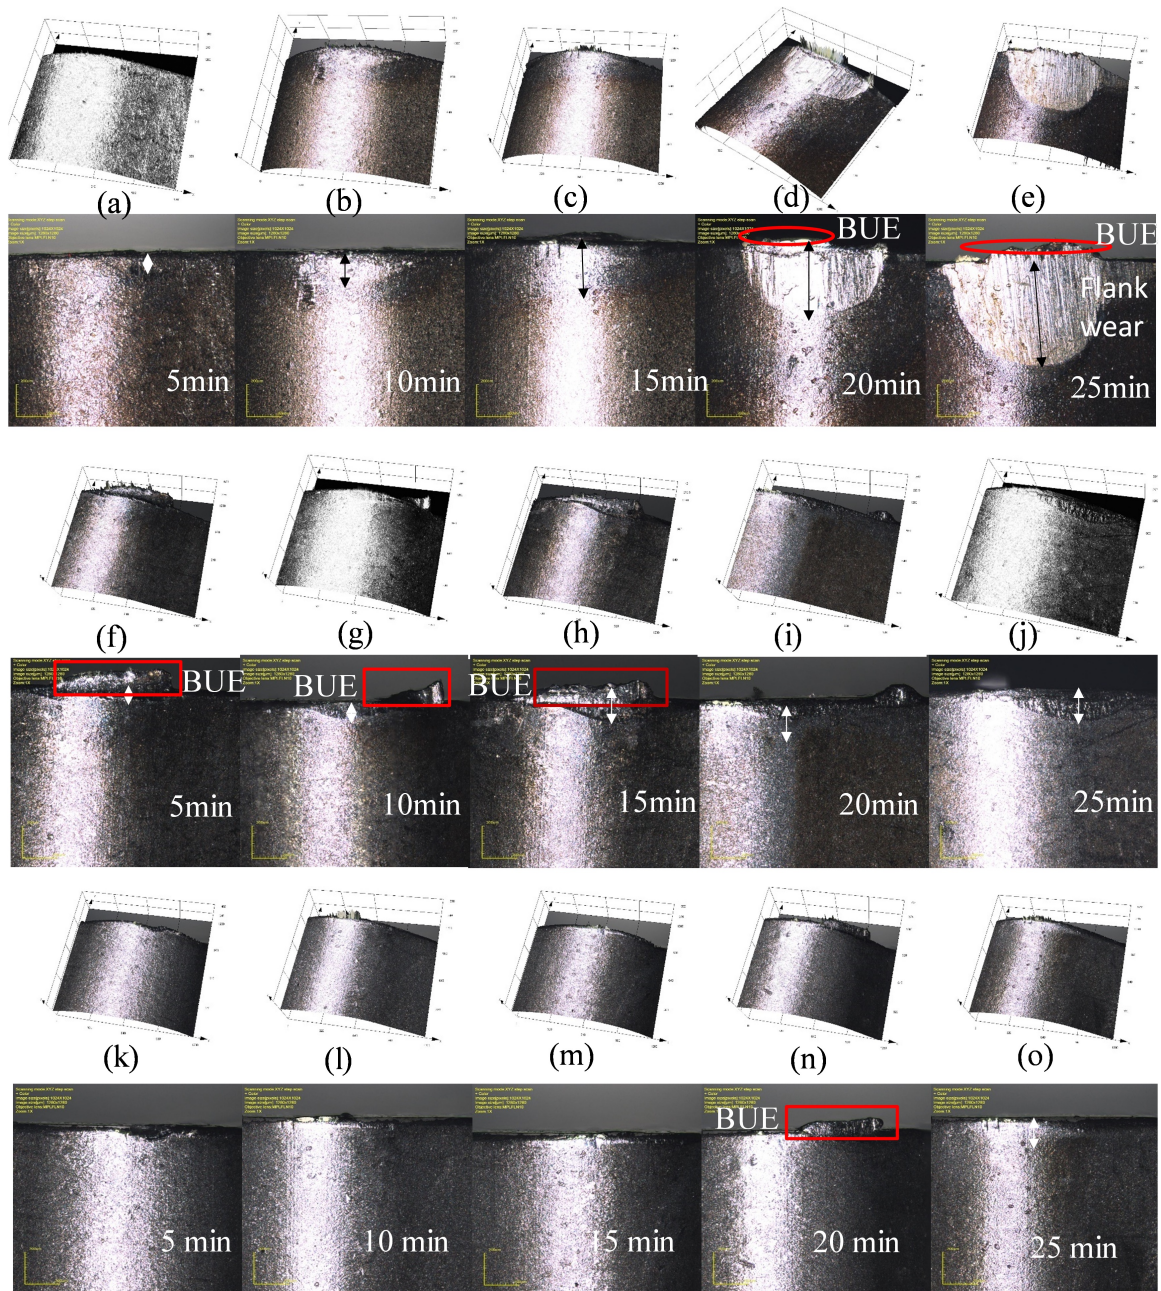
Tool wear measurements for (a-e)uncoated tool, (f-j) Ti-multilayer coated tool and (k-o) TiC-C coated tool
